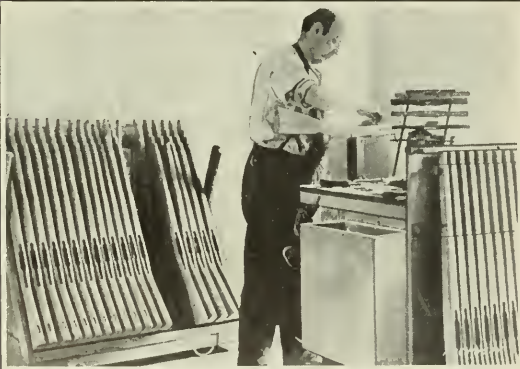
In manufacturing military rifle stocks, each stock must be finished so as to present a good appearance. In the United States arsenal special trucks are used to carry the finished rifle stocks to prevent marring finished surfaces
